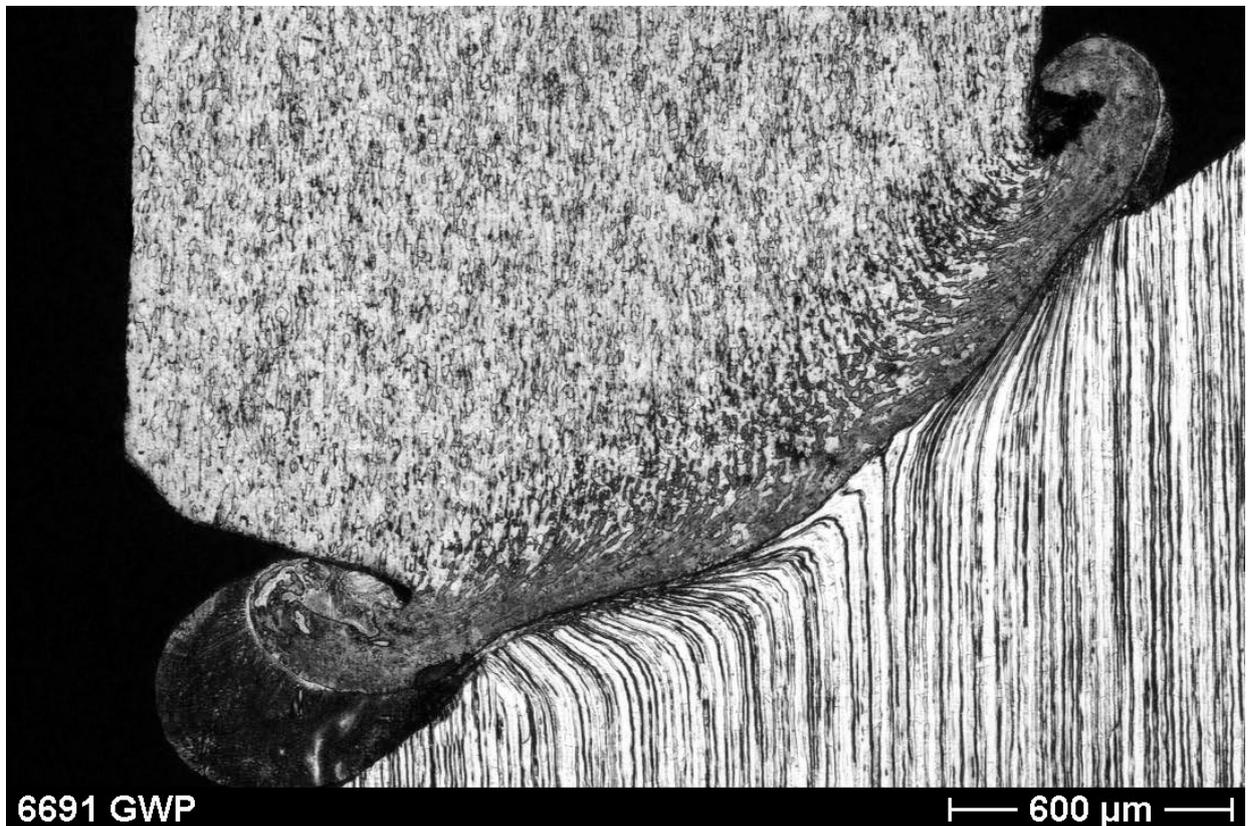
Condenser discharge welding of the plug (above, ferritic steel) and cold gas cylinder (below, austenitic steel).
